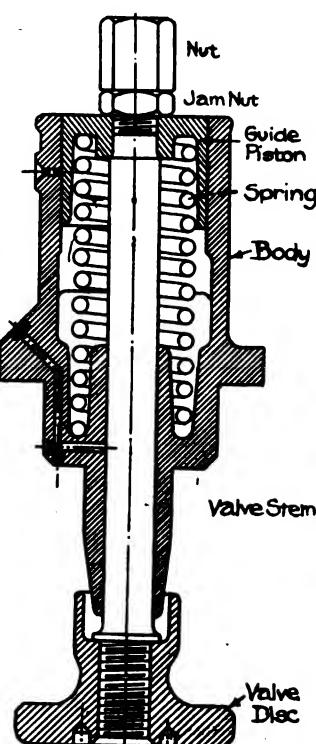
Exhaust valve section, indicating screwed on cast iron valve head
